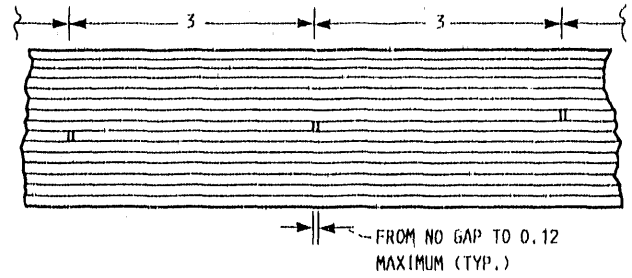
Details of veneer butt joints for tension, compression, and fatigue specimens. (Dimensions are in inches.)
